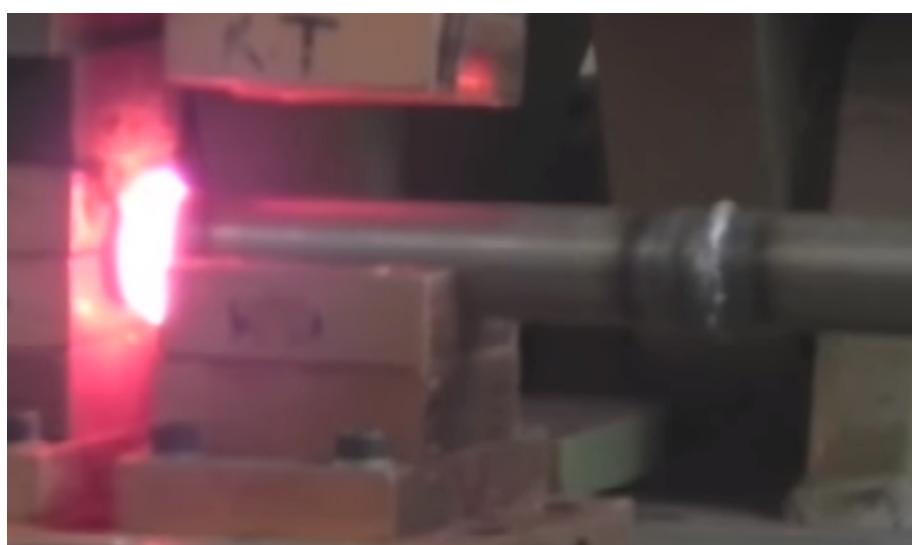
Pipe welding on the *MCO-201H* machine
